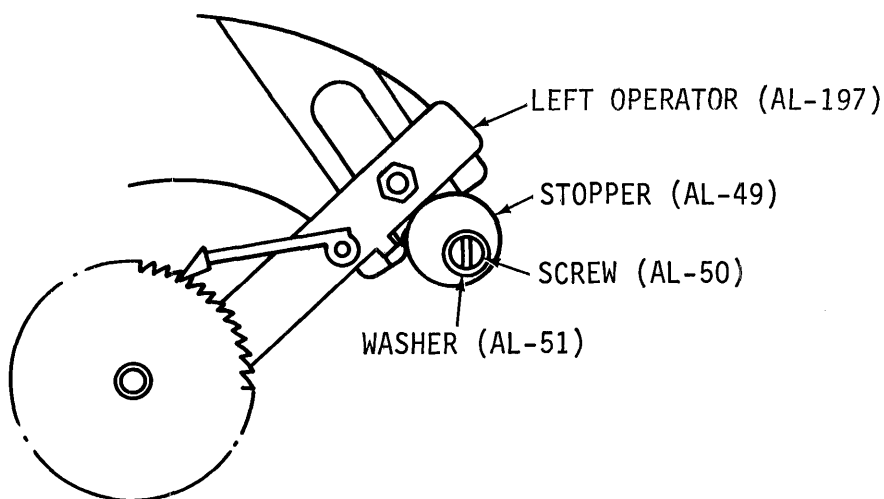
LEFT OPERATOR AND STOPPER ADJUSTMENT
